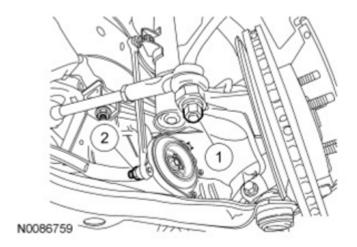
Identifying Stabilizer Bar Link And Nut Courtesy of FORD MOTOR CO.
